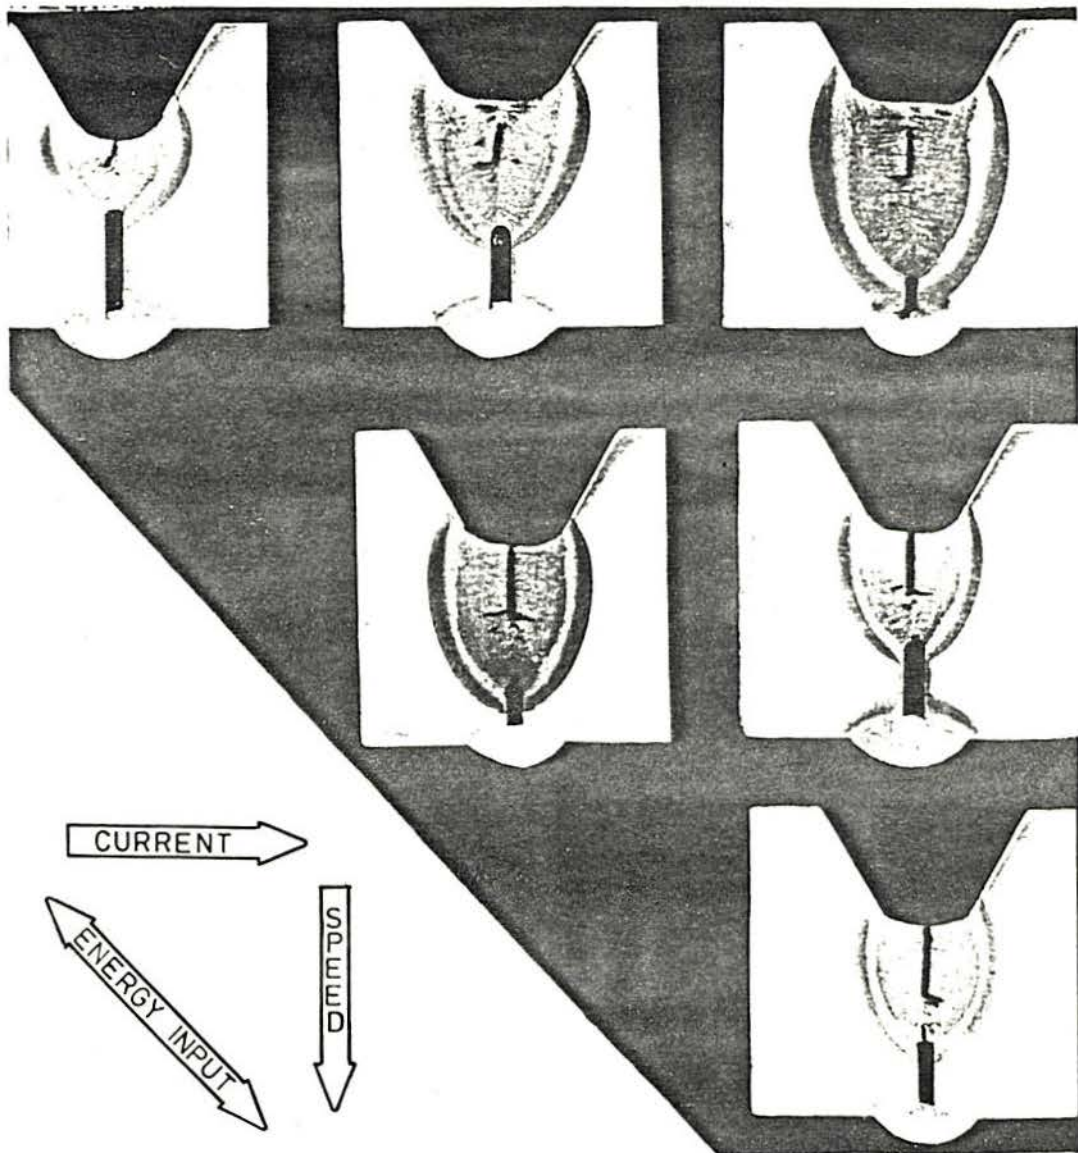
HY 100 WELDMENTS.
